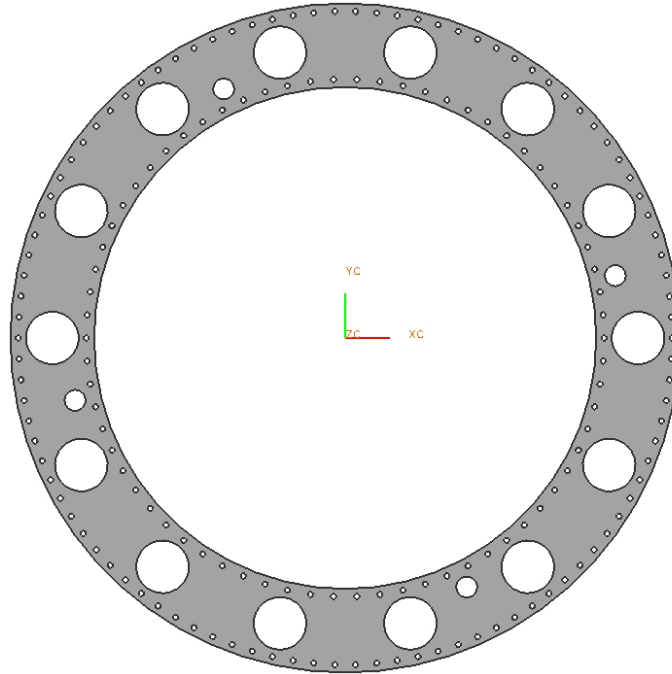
Inconel liner plate designed to hold 14 premixers, 4 igniters, and 119 unblocked dilution holes.
